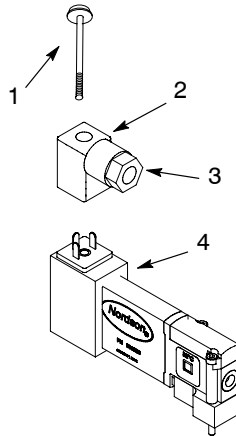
Remove the quick-disconnect connector from a solenoid valve
